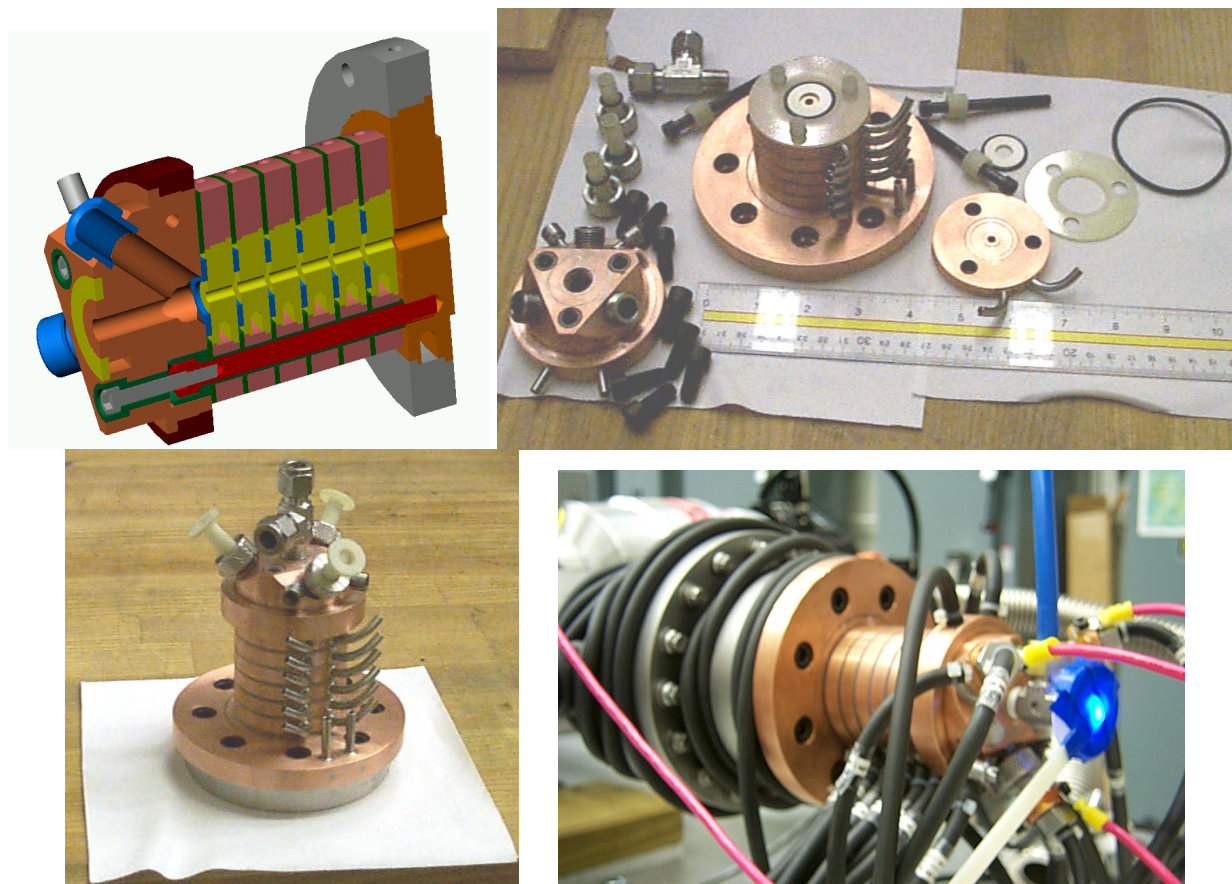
A4: Plasma porthole cutaway, pieces, assembled, and in operation.
